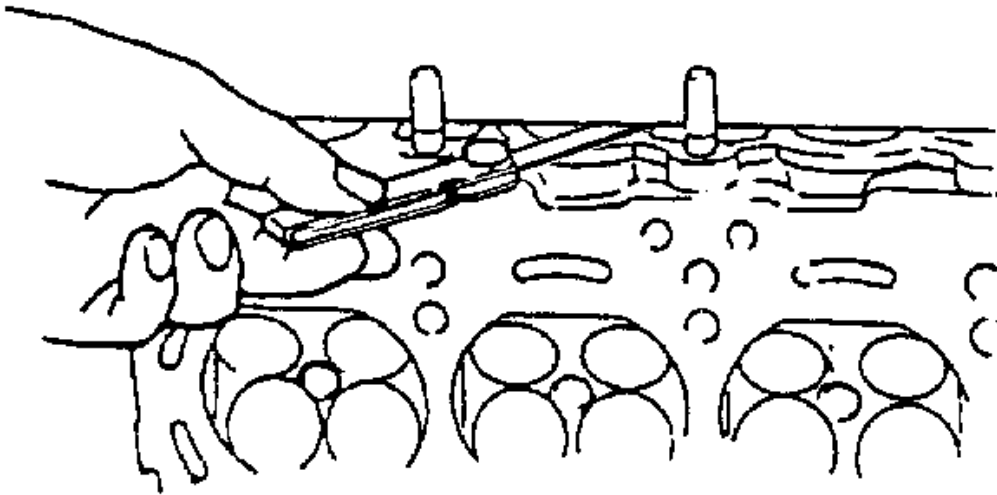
Inspecting Cylinder Head Exhaust Surface For Flatness
